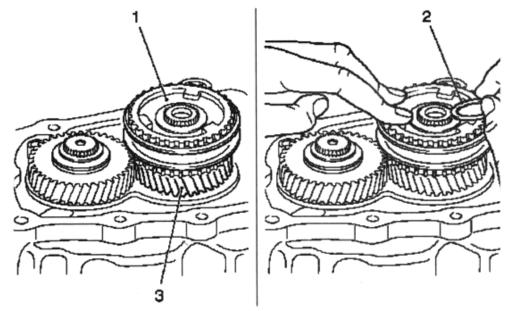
Setting dentate wheels, gears fifth transfer and Corps synchronous mash fifth transfer with Chief Shaft:
